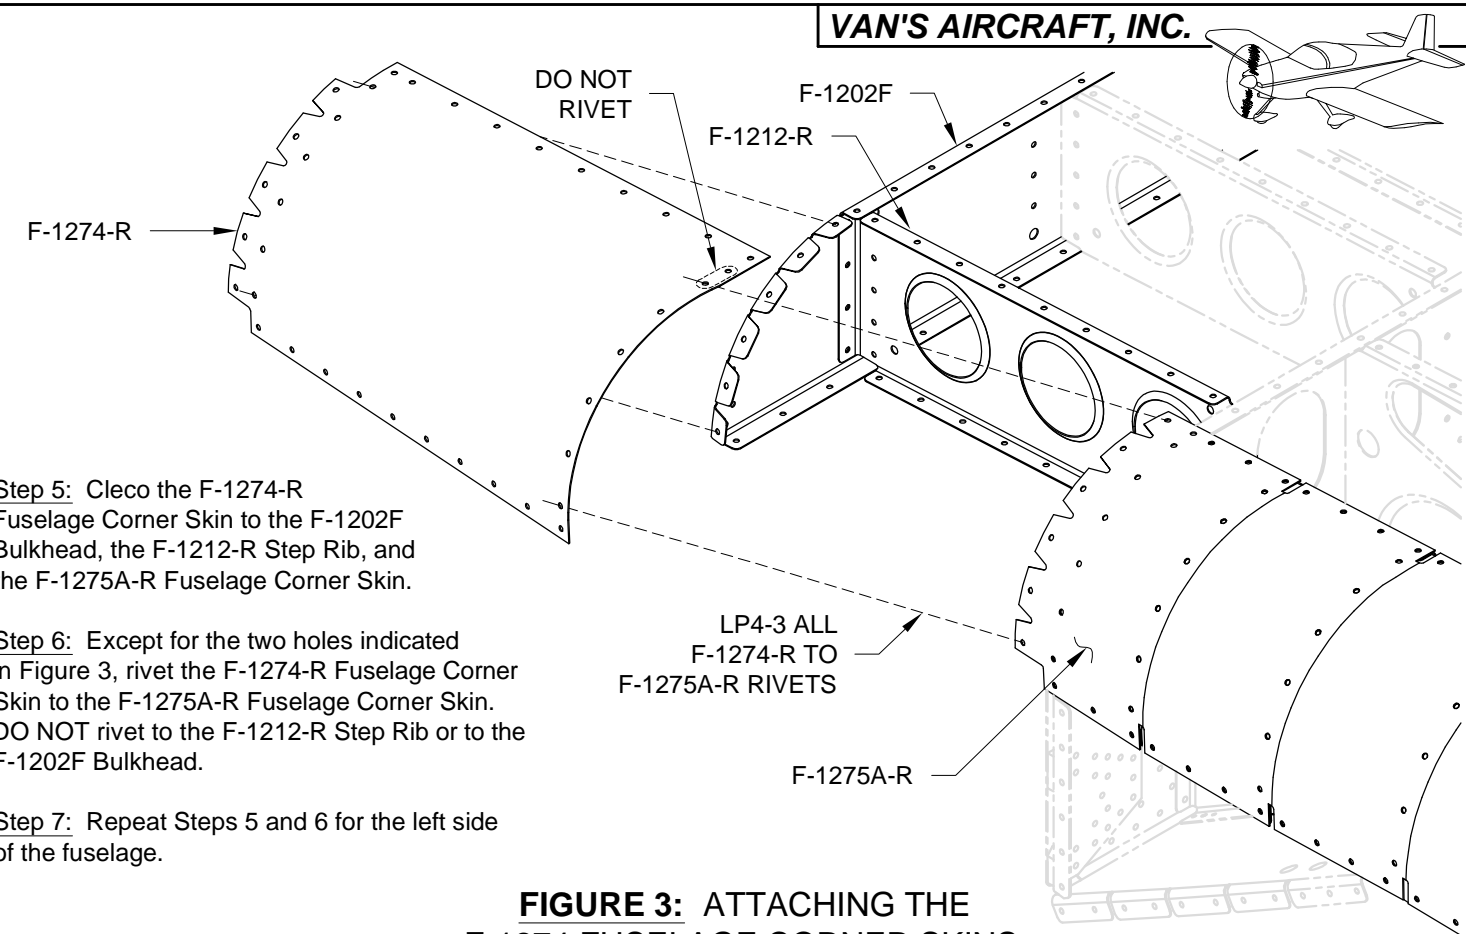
ATTACHING THE F-1274 FUSELAGE CORNER SKINS
